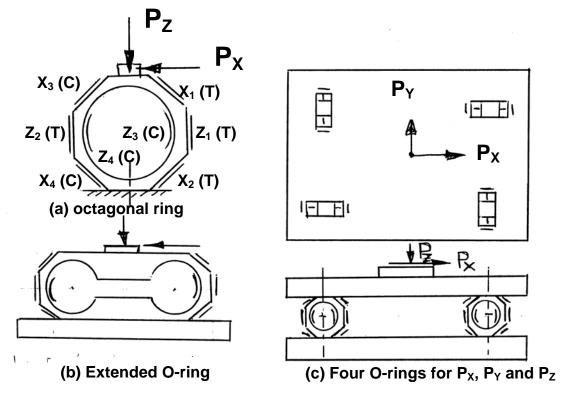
Scheme of strain gauge type 3 – D milling dynamometer
